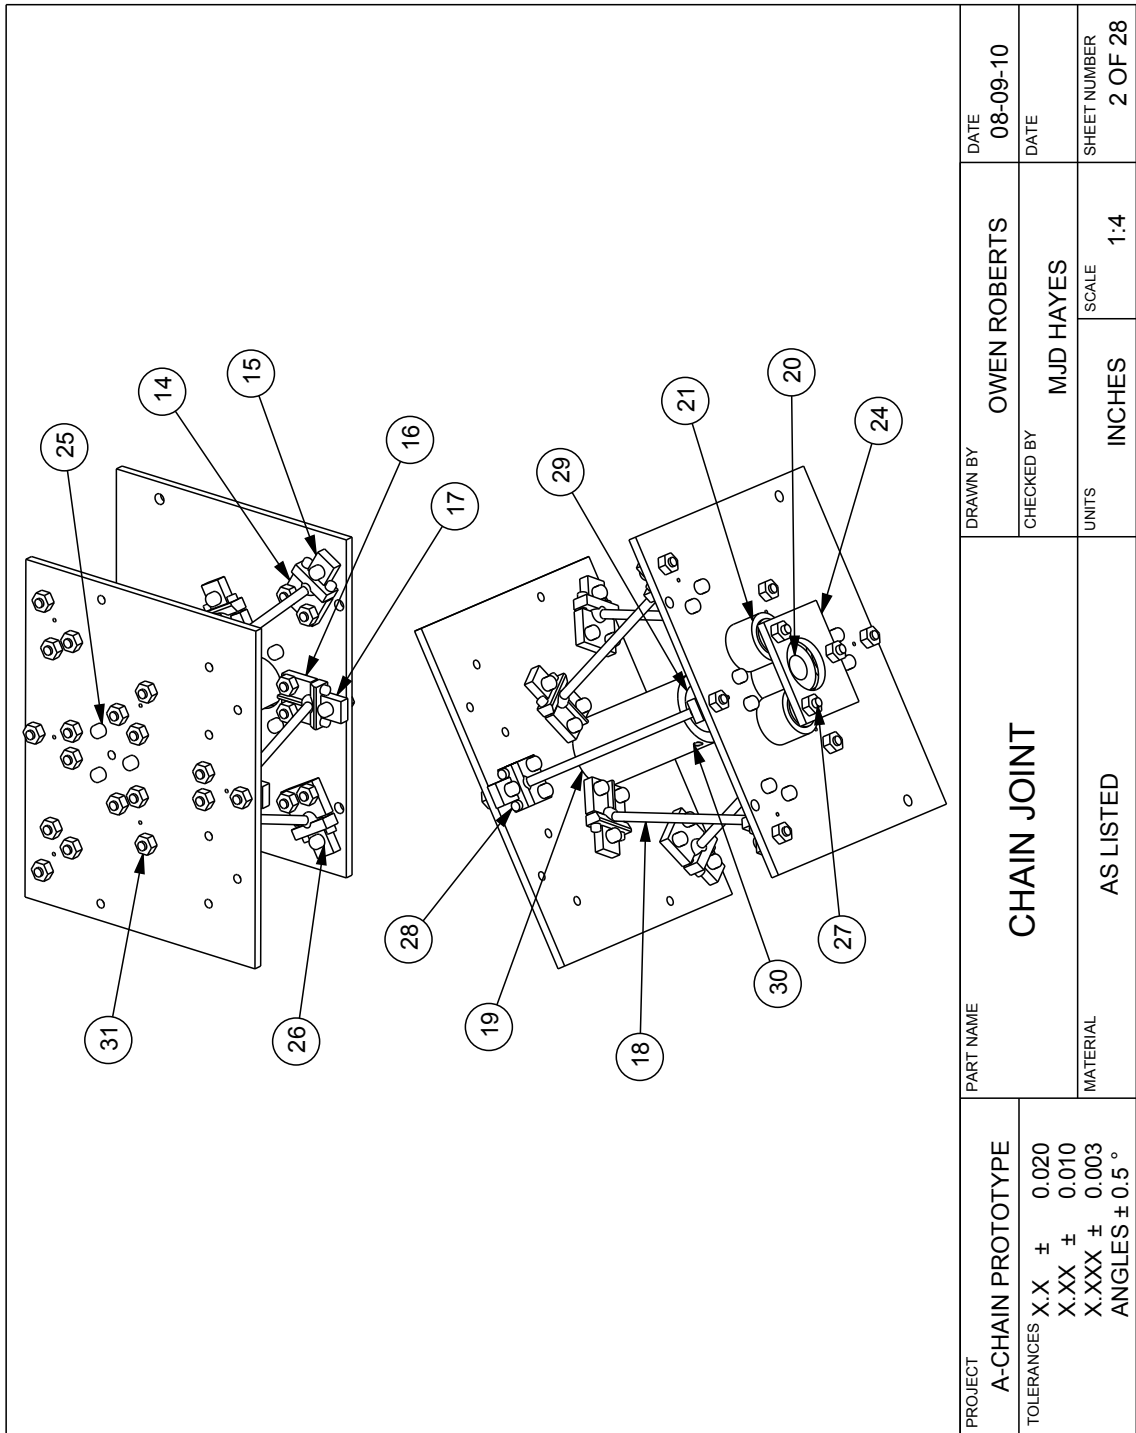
Assembly drawing of joints of the prototype manipulator.
